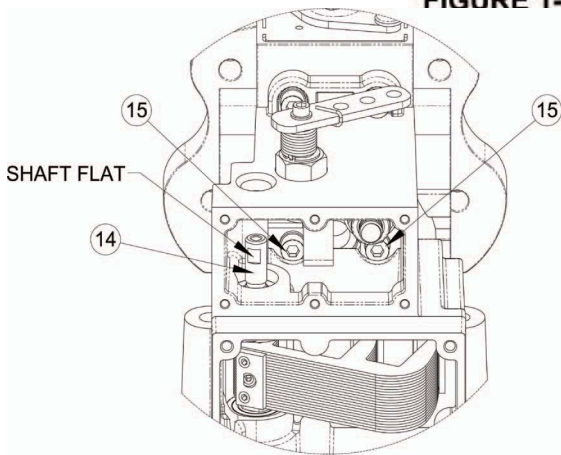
LOWER COVER AND LEVER ASSEMBLY NOT SHOWN FOR CLARITY
